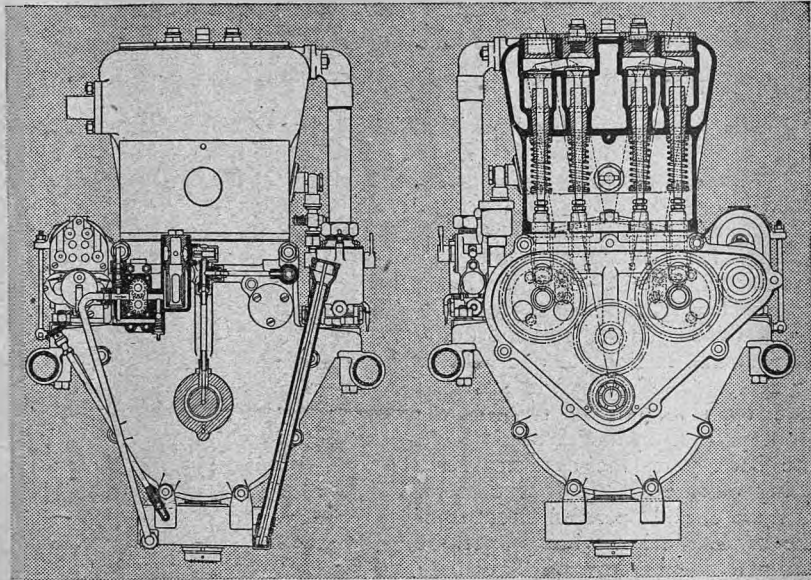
Two part sectional views of the 12 h.p. Lion Peugeot engine. One showing the valve and valve motion gear, and the other the lubrication system.
